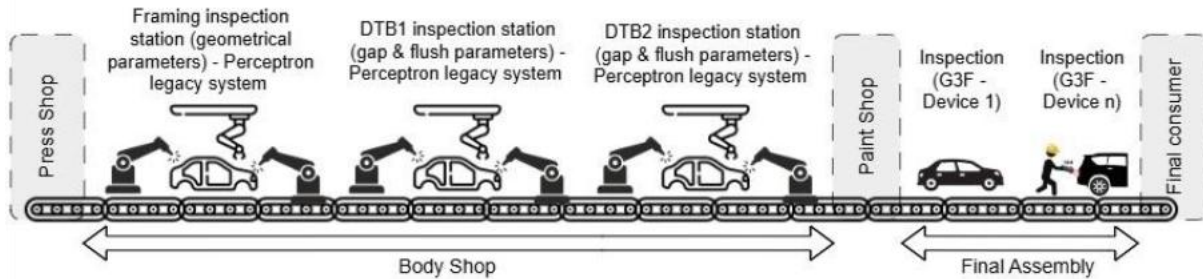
Layout of the sequence of the inspection stations in the Body Shop and Final Assembly areas
